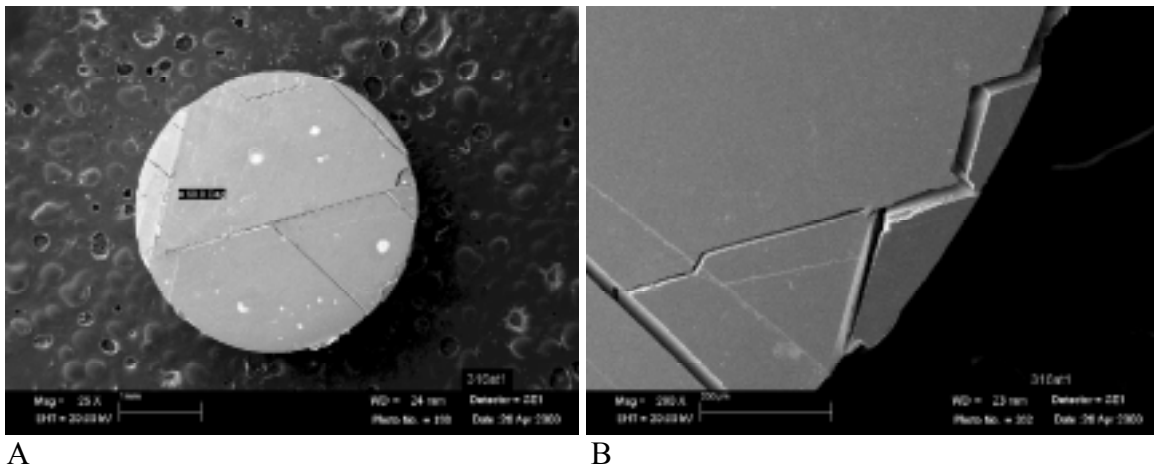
A and B. SEM images revealing cracking at 60° and 120° on the bottom surface of a single crystal tungsten core from a fully-tested 810°C HIP-bonded 316L SS clad single crystal tungsten push-out test specimen.
